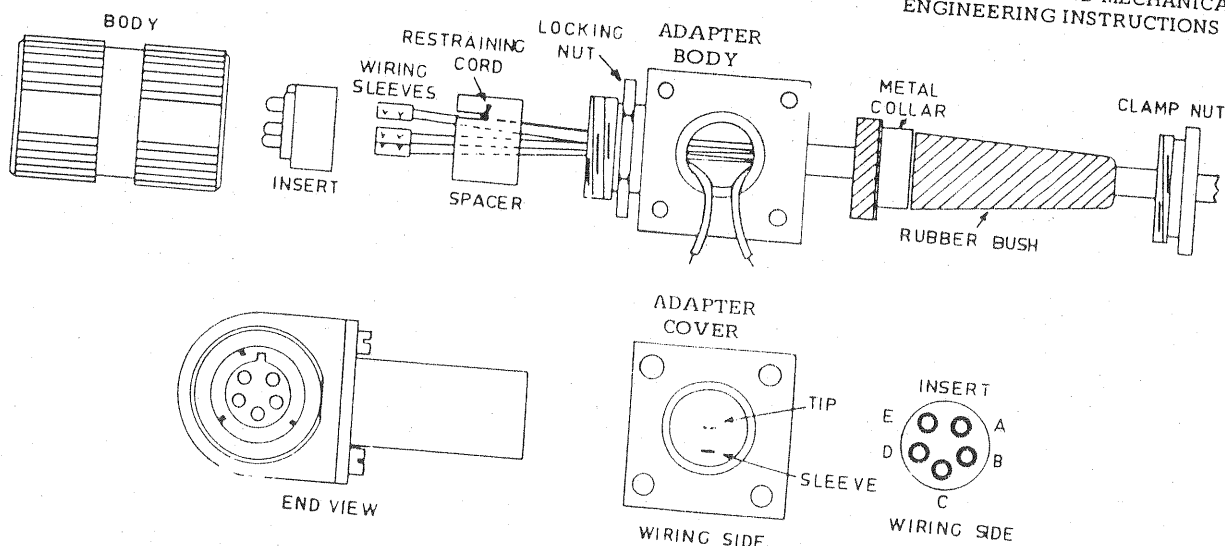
FIVE PIN PLUG WITH ADAPTER
